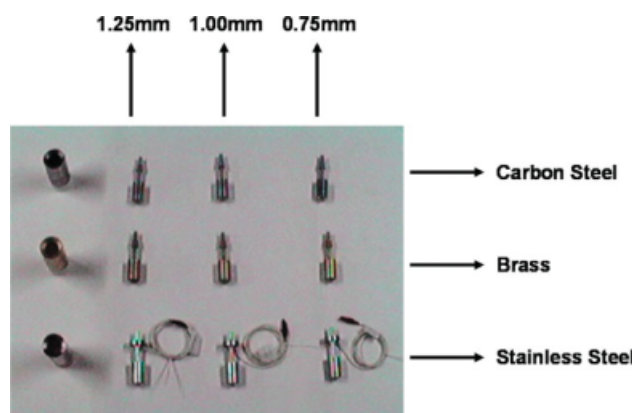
Manufactured cylindrical electrodes. [Color figure can be viewed in the online issue, which is available at www.interscience.wiley.com.]
